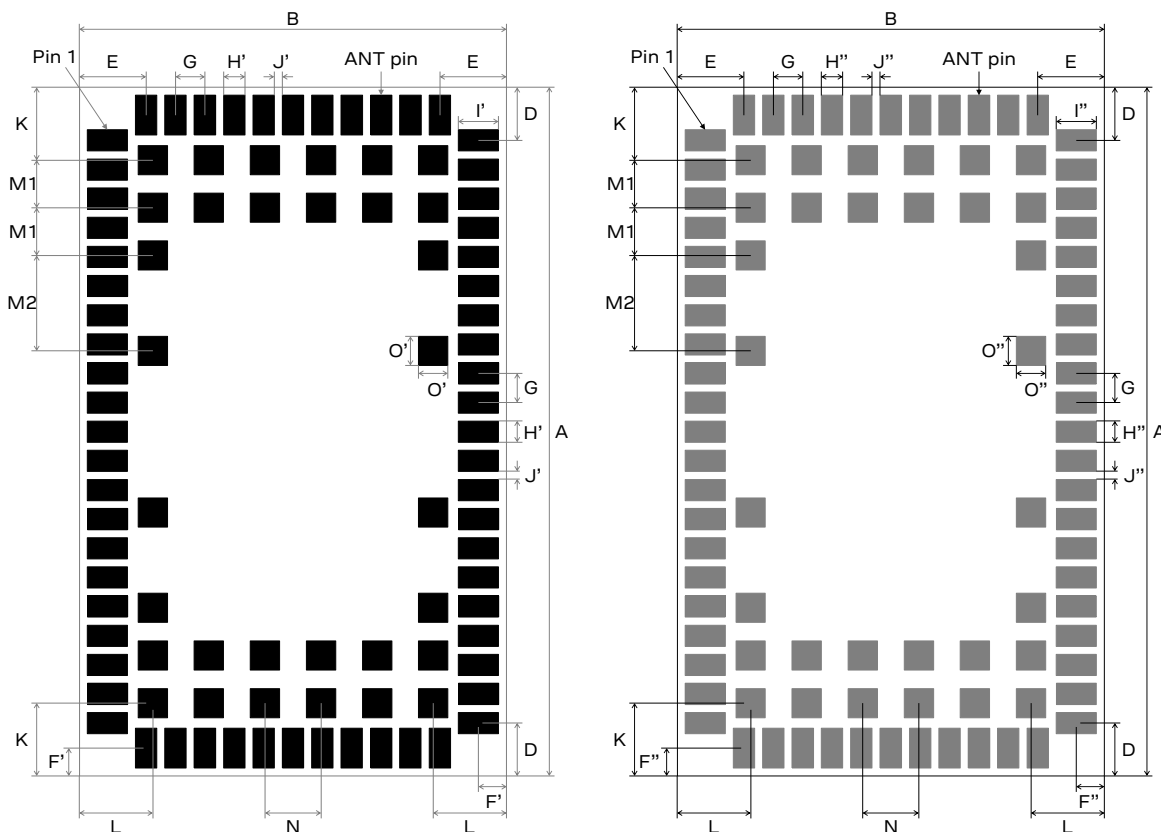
SARA-G450 modules suggested footprint and paste mask (application board top view)
